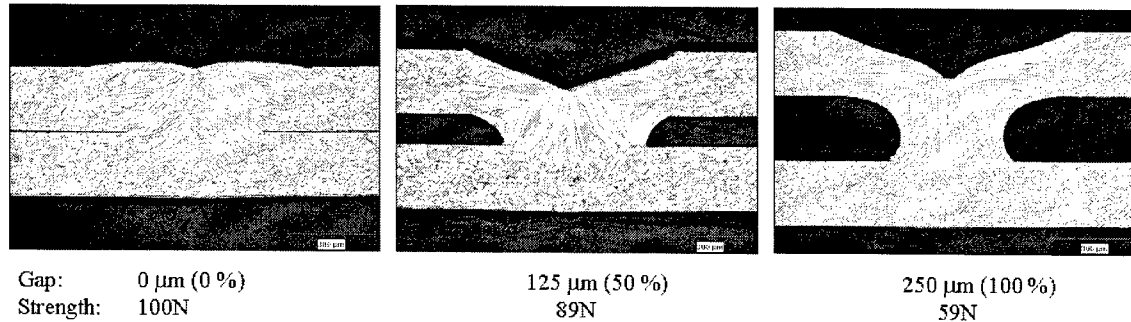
Cross-sections of laser penetration spike-welds in 250 μm thick sheets of X8CrNi1812 stainless steel. All welds have been made with the same laser pulse-shape, see text.
